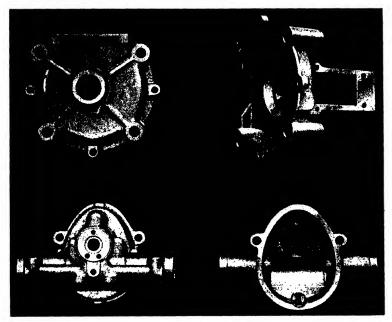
GROUP OF MAZAK DIE-CASTINGS. THE UPPER ILLUSTRATIONS SHOW THE CRANKCASE UNITS OF A SMALL PETROL ENGINE
